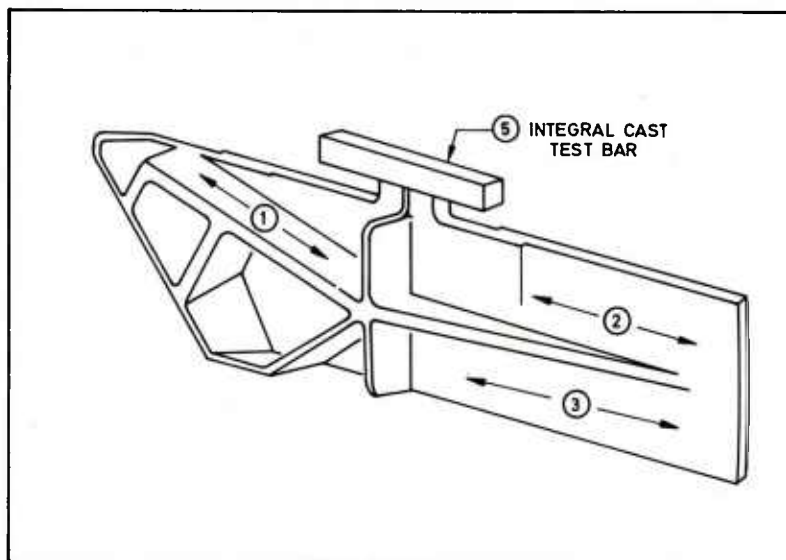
Longeron fitting attach casting showing test locations; cast from alloy A 357-T6 (G-AlSi7Mg) in a greensand mould.
